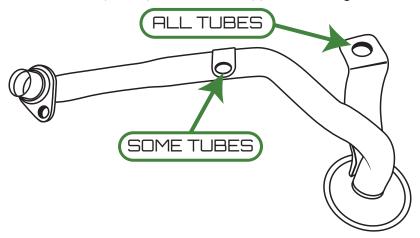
Hole(s) to Enlarge on the Pickup Tube (Screen)
